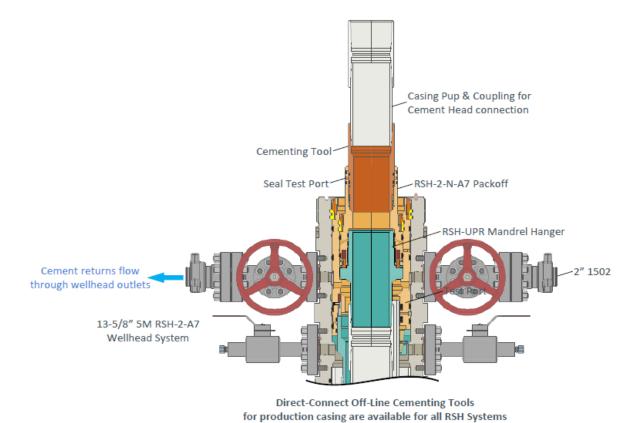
Vault 7" 5M offline cementing tool. Pressure rating limited by the lesser of 5M tool rating or the 7" pup joint and casing.
